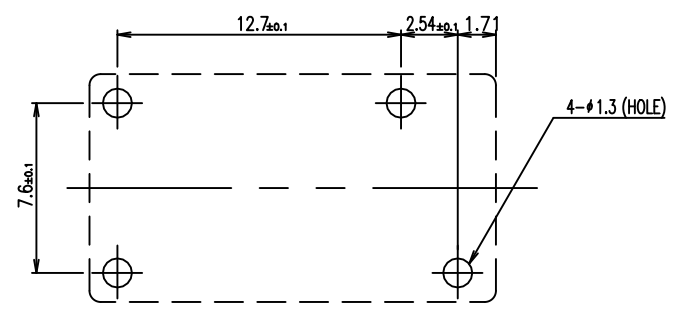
FIGURE FOR PRINTED CIRCUIT BOARD PROCESSING (BOTTOM VIEW)
